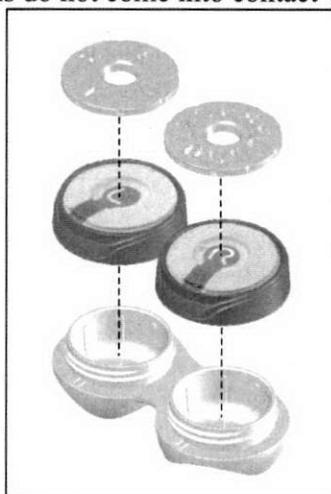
A Exploded View of the lens case illustrating the coloring of the Outer Lid
